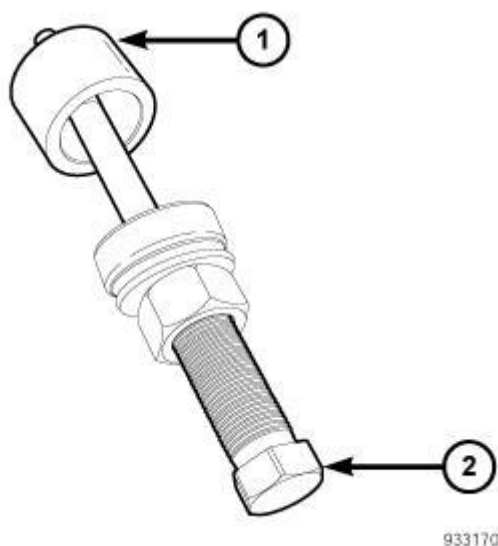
Vibration Damper & Bolt Grip Puller
